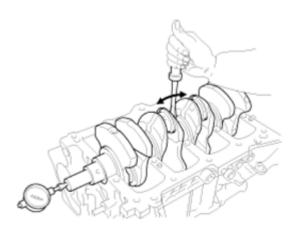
Checking Crankshaft End Play Courtesy of KIA MOTORS AMERICA, INC.
